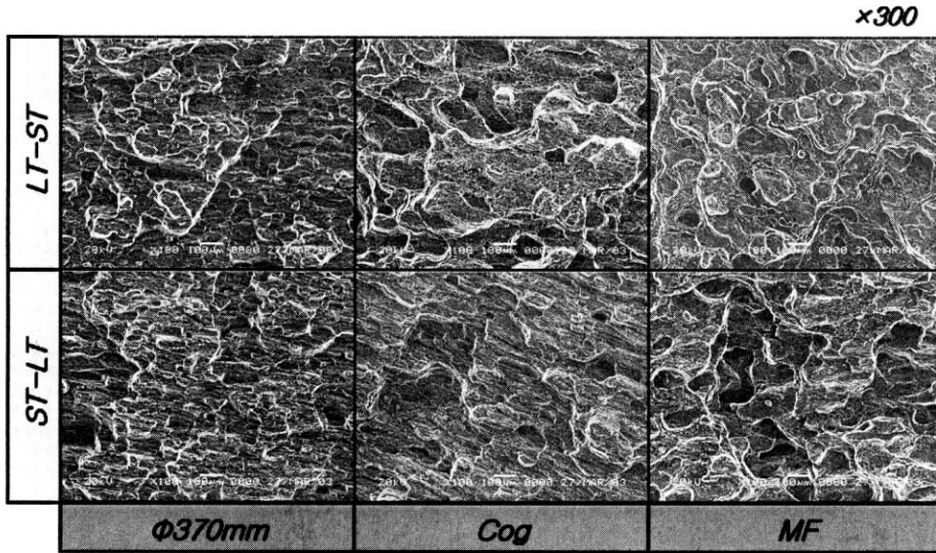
SEM fractographs of KIC specimens in ring roll forged specimens under T_{74} condition.
